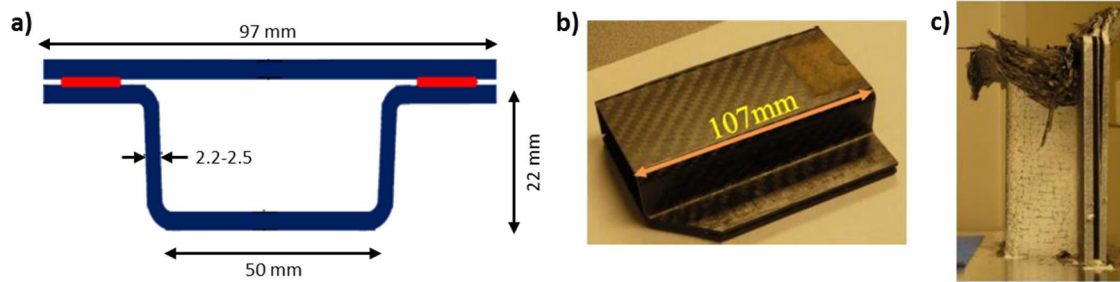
Images of the hat section bonded to a flat plate, including a) cross-sectional dimensions, b) a photograph of the structure ready for drop tower testing, and c) the structure after drop tower testing.
